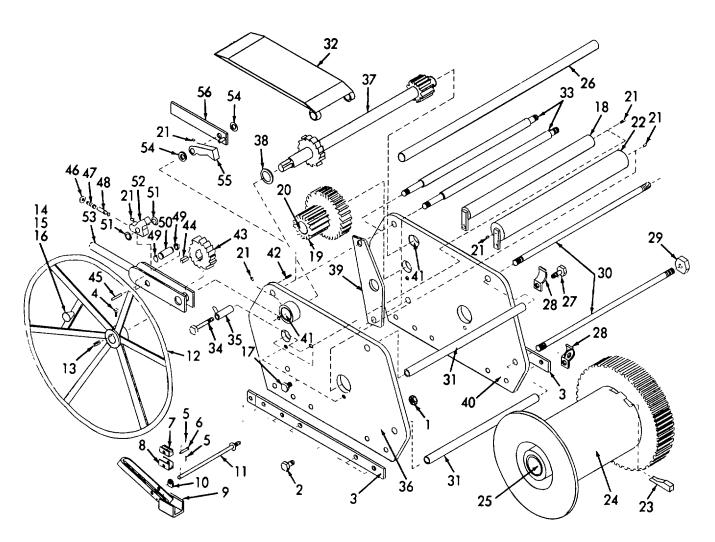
Anchor Winch, Removal, Disassembly, Reassembly, and Installation.
